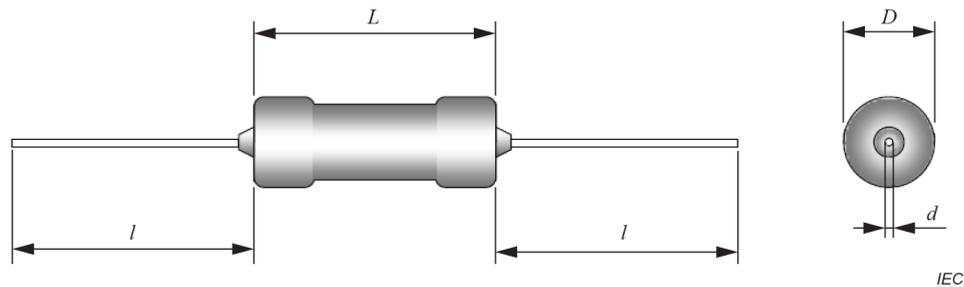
Shape and dimensions of cylindrical axial leaded resistors
